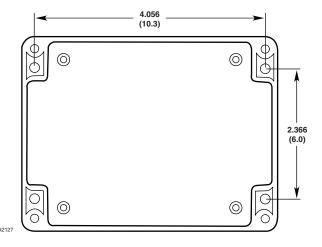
Mounting Dimensions of the TXL Detector in Inches (CM)
